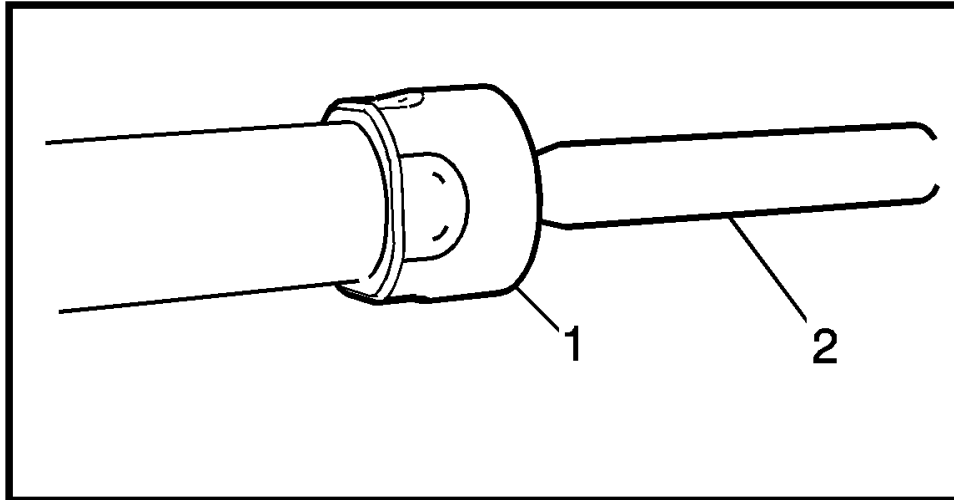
Measuring Lash Between Inner Tie Rod & Steering Gear Housing
